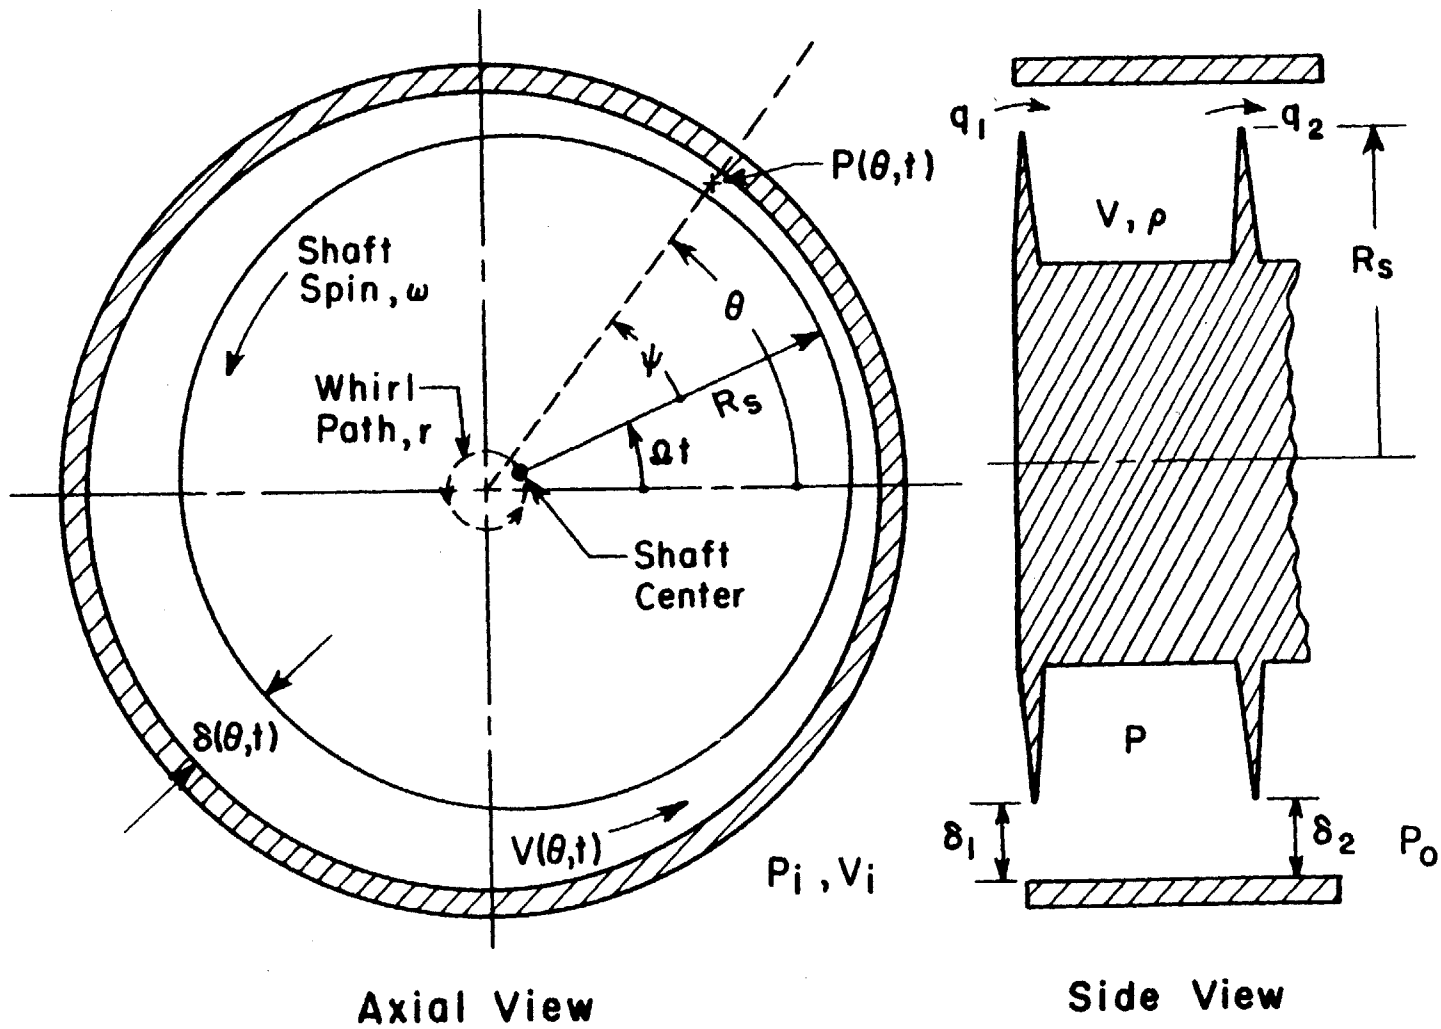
Axial and side view of single chamber seal showing the geometry and kinematics of the whirling seal.
